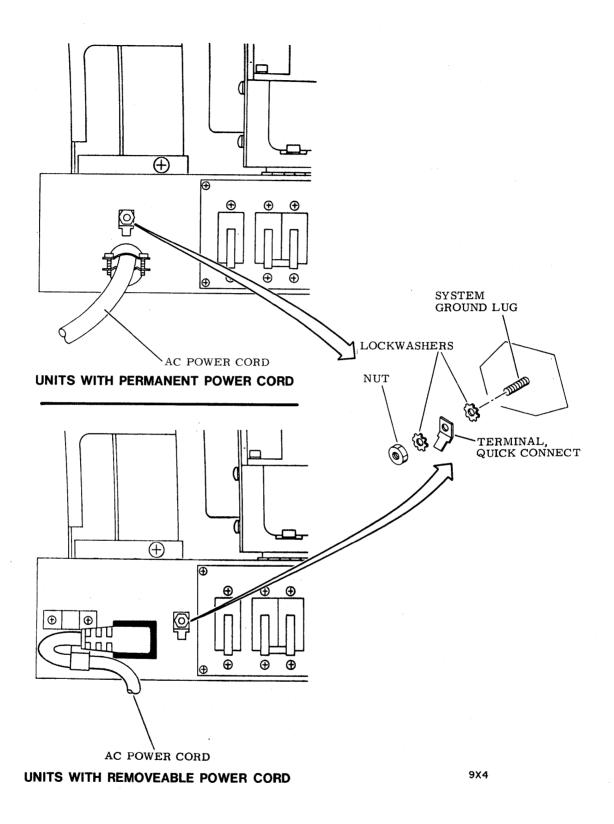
Cable Installation - Parts Location View (Sheet 2)
